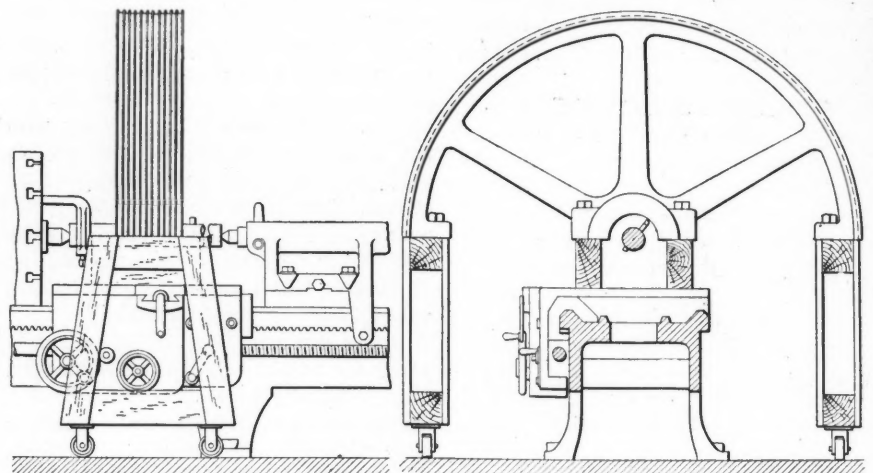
ARRANGEMENT FOR REBORING A LARGE DRIVEWHEEL
